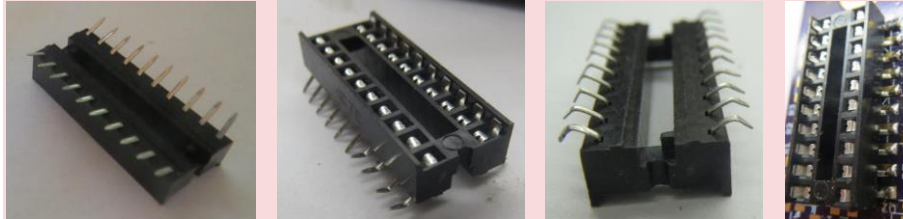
Converting 20-pin DIP socket to 20-pin SMT Socket
